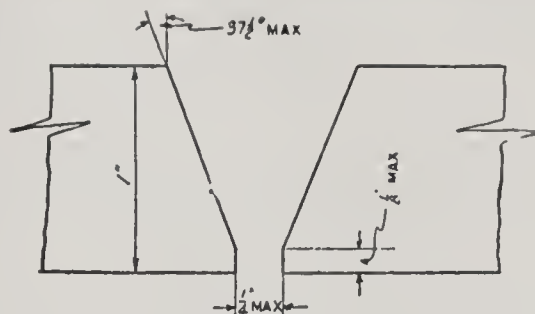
(b)—Alternate Butt Joint for Plate 1 In. Thick (May be Used for the Oxyacetylene Process Only)
